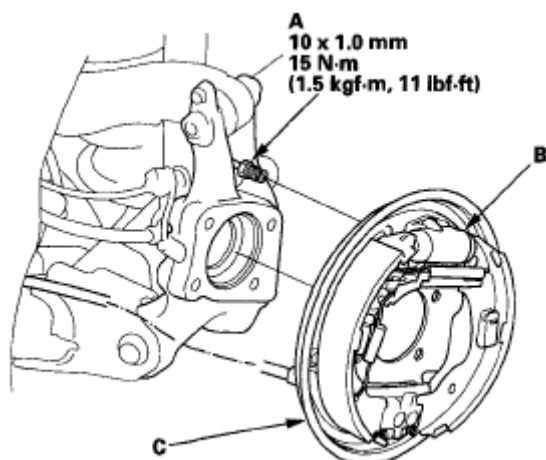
Identifying Rear Brake Assembly From Knuckle (With Torque Specifications)
